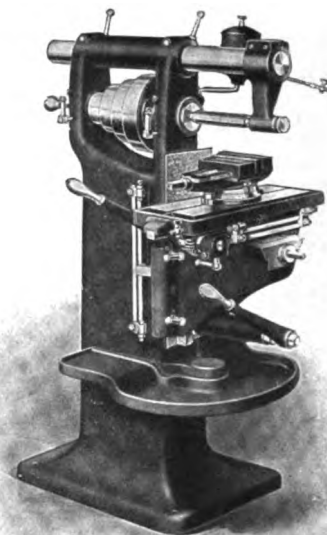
No. 0 "Steptoe" Hand Miller Lever Elevation to Knee
